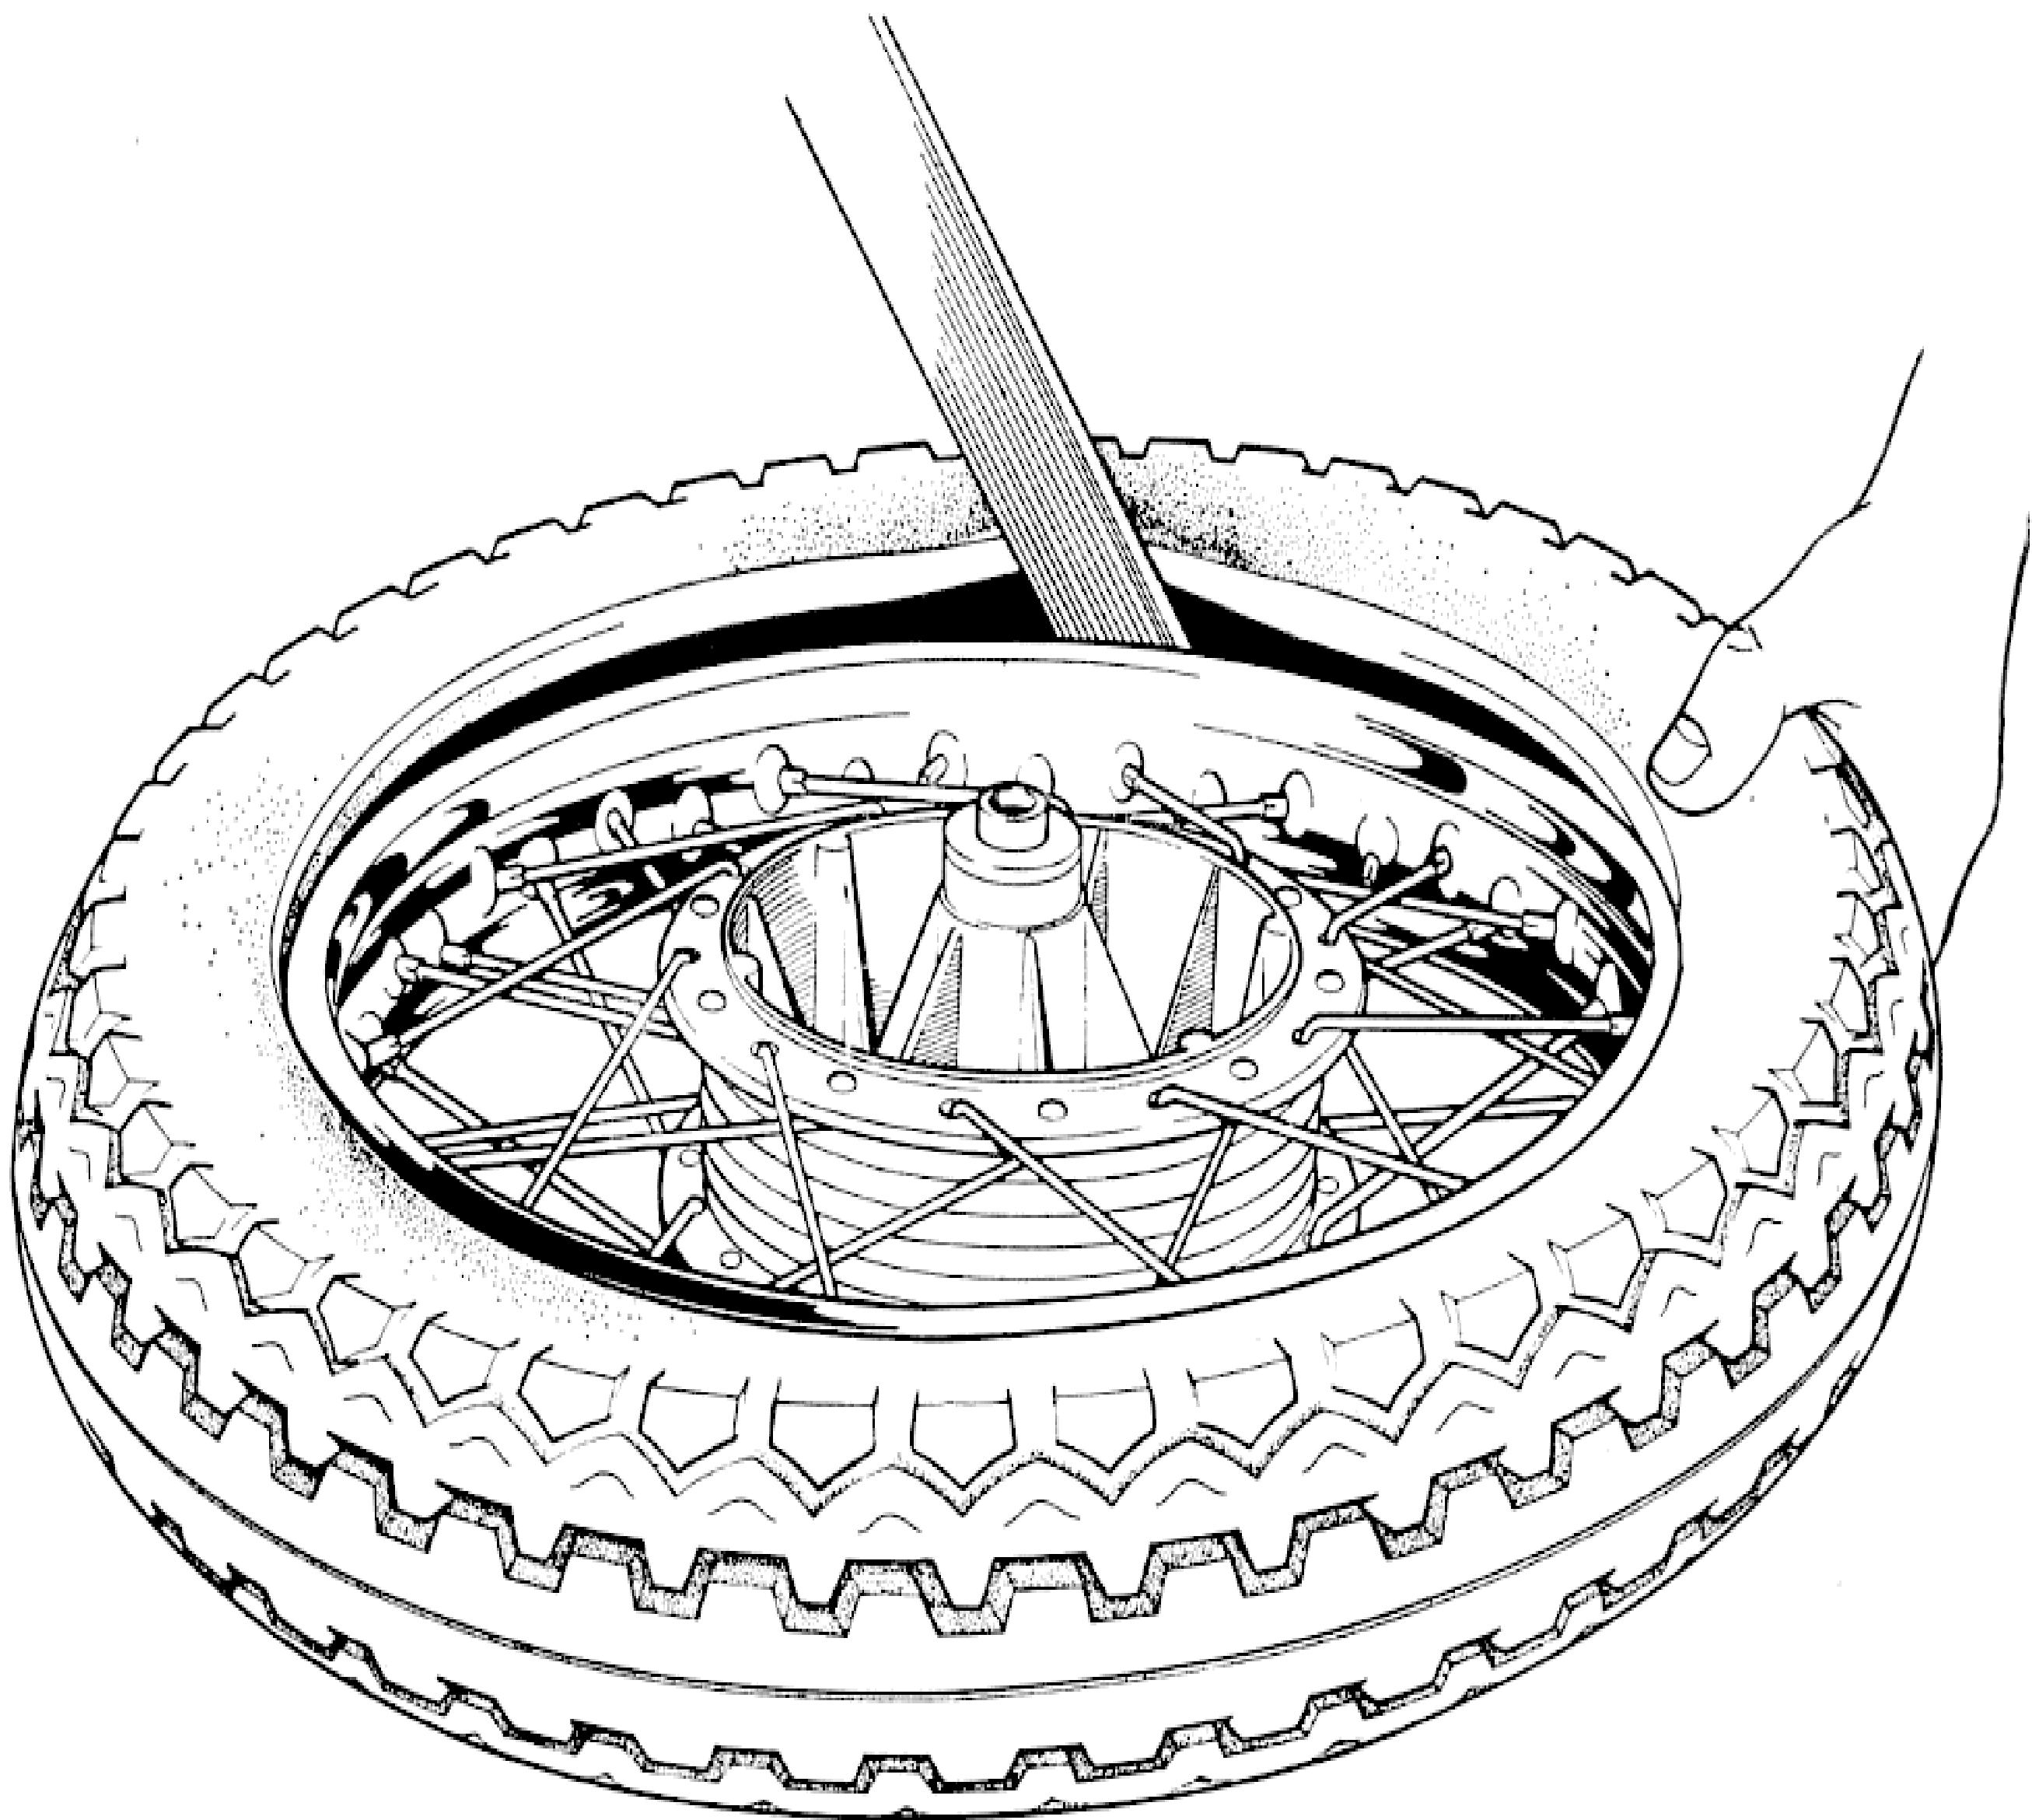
Refitting tyre to wheel with valve engaged in rim hole
